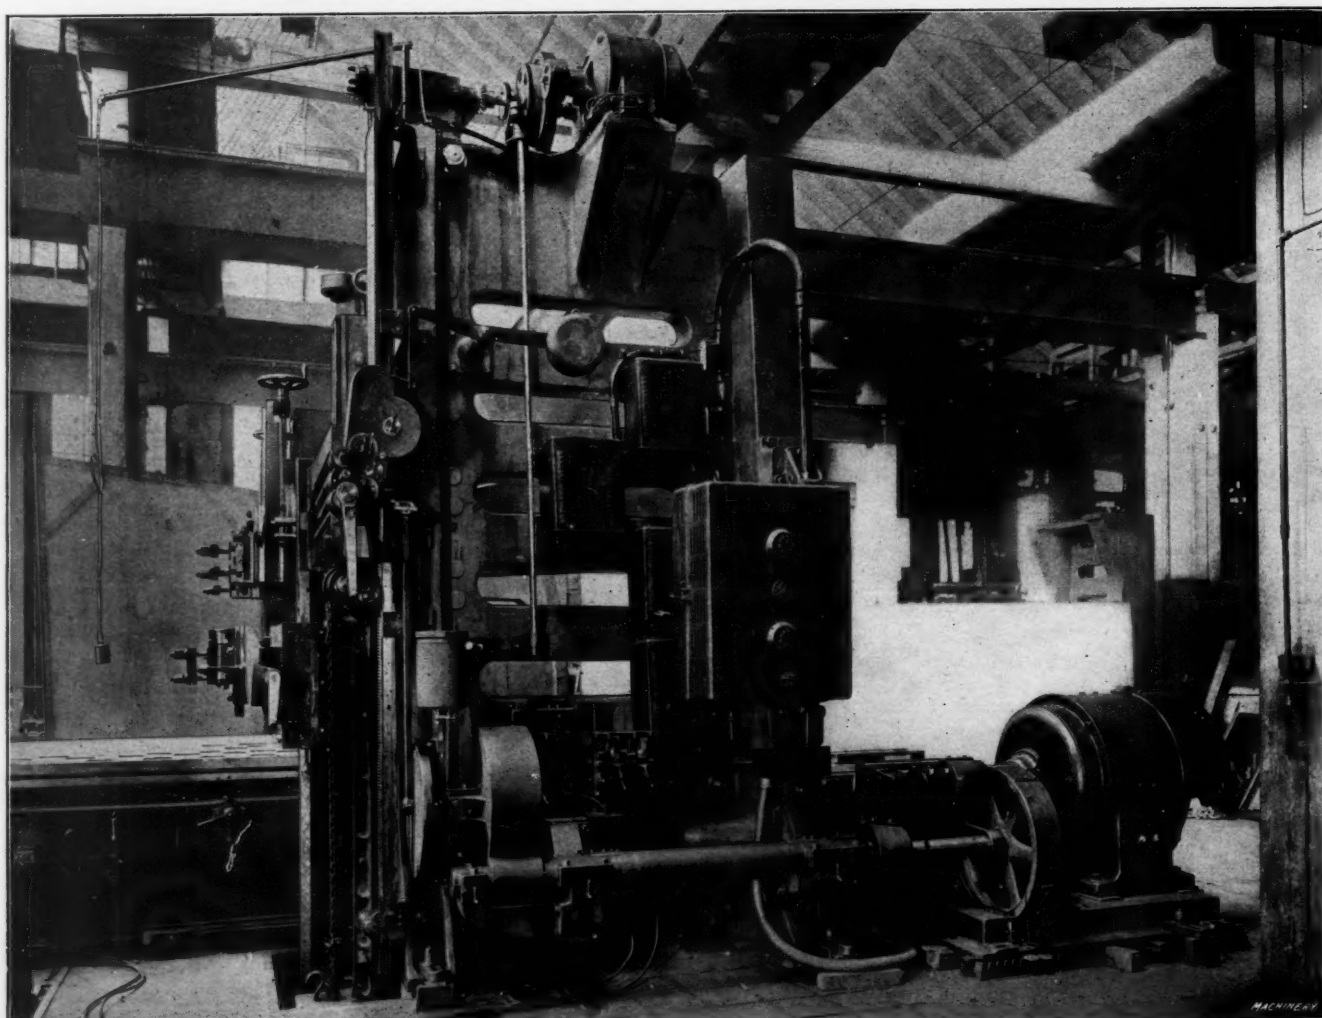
Side View of Convertible Planer shown in Figs. 1 and 2 illustrating Arrangement of Drive
